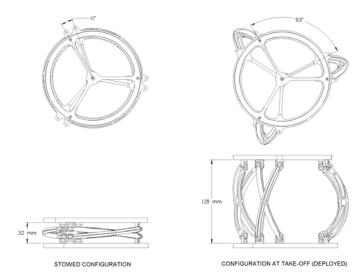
Cylindrical Scissor Mechanism in Folded and Deployed Configurations
